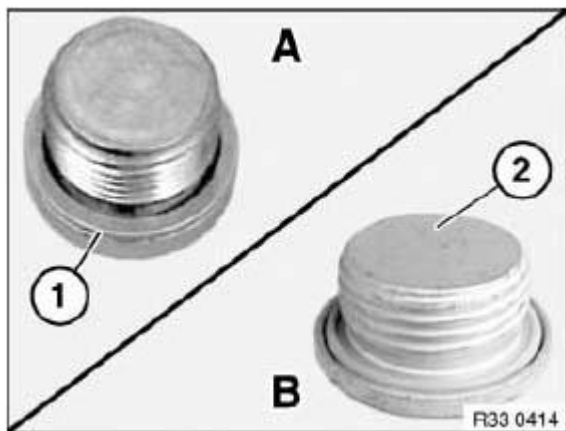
Identifying Oil Filler Plug With Sealing Ring
